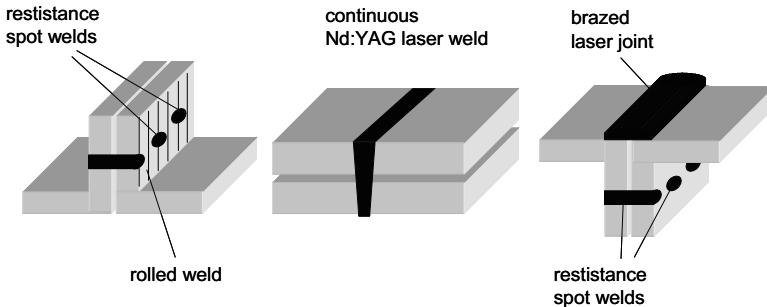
Joint geometries and associated welds and welding techniques for a roof-body-seam; left: roll and RSW; middle: Nd:YAG laser welding; right: brazing and RSW
